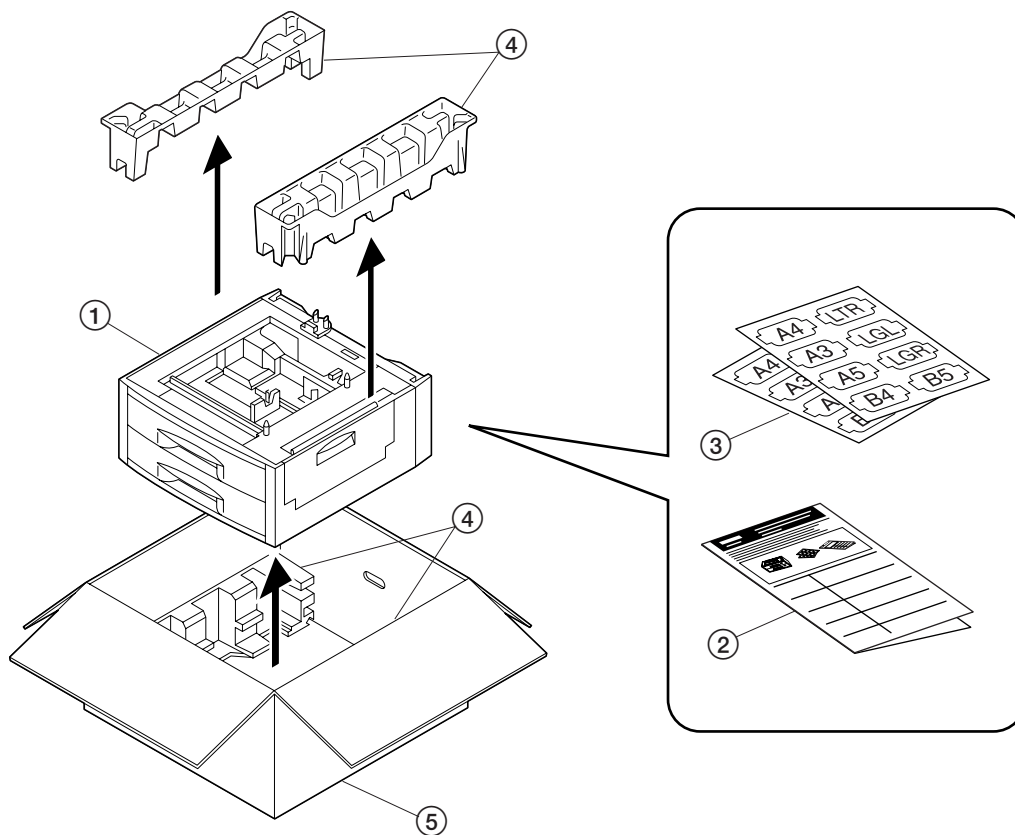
Unpacking the paper feeder (or duplex unit)
